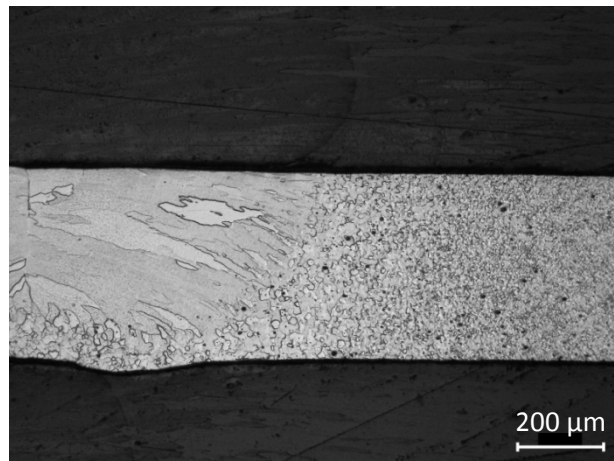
Macrograph of G-G 0.5 mm thick similar joint showing the welded zones
